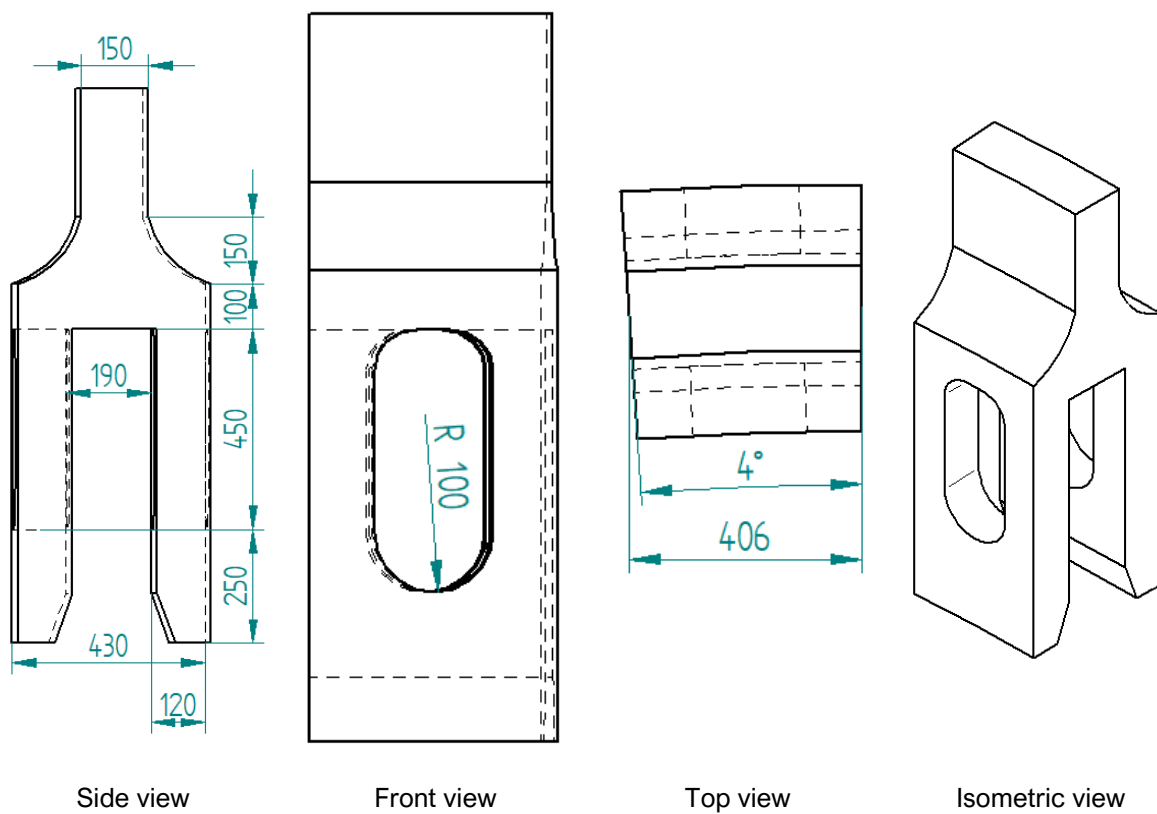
Dimensions of the UF (all dimensions in mm)
